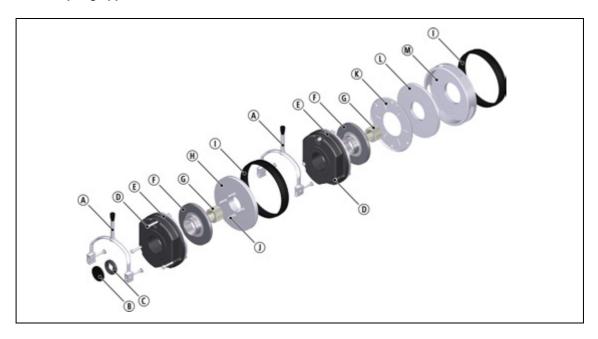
Double spring-applied brake INTORQ BFK458-06 to 25
